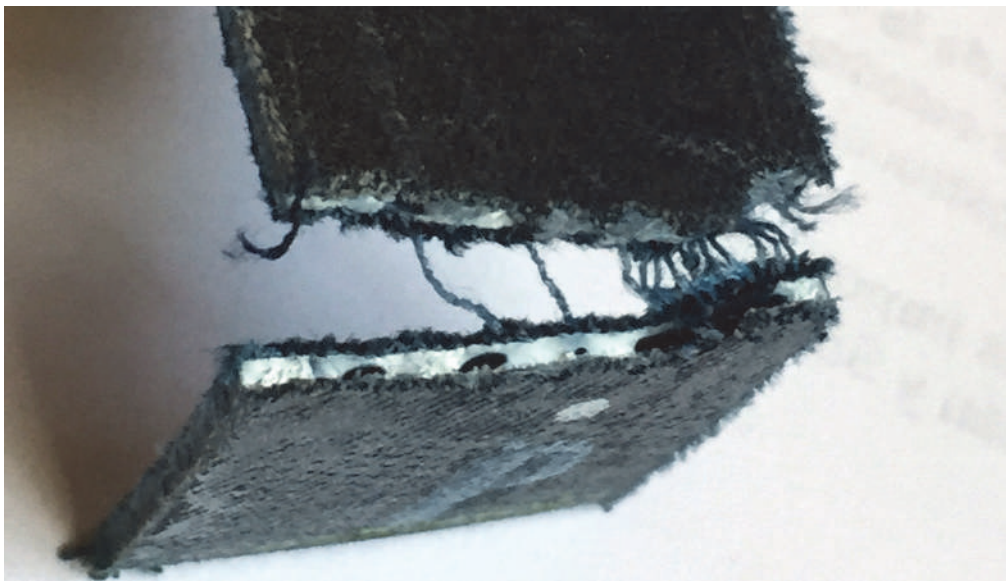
Close up at the fracture zone of denim-PP tensile specimen.
